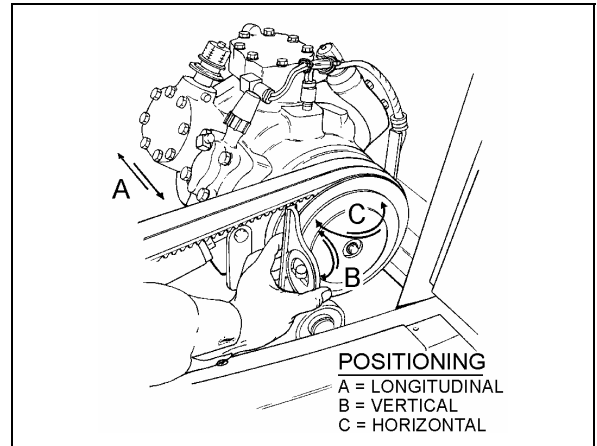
COMPRESSOR ALIGNMENT 22072
